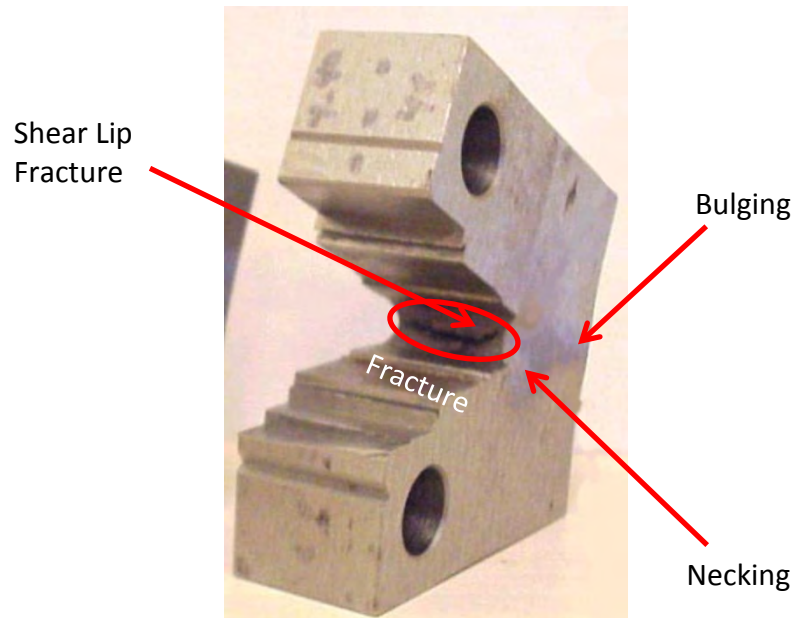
Fractured compact tension specimen with visible fracture, necking, and bulging (Kanvinde et al. 2004)
